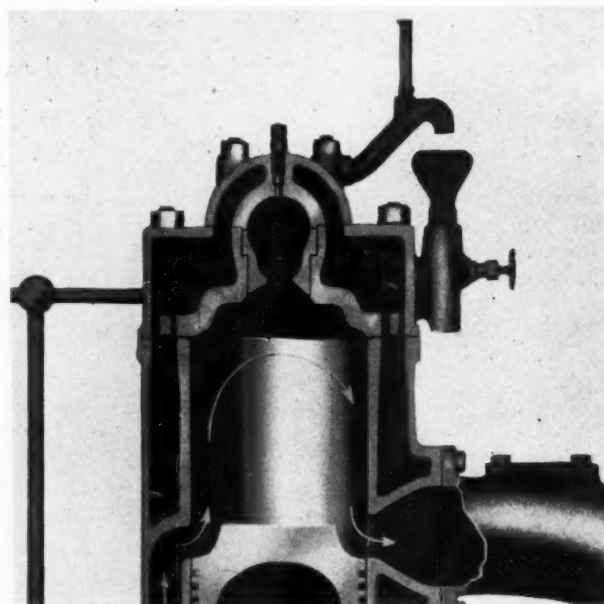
MODERN PRECOMBUSTION OIL ENGINE
